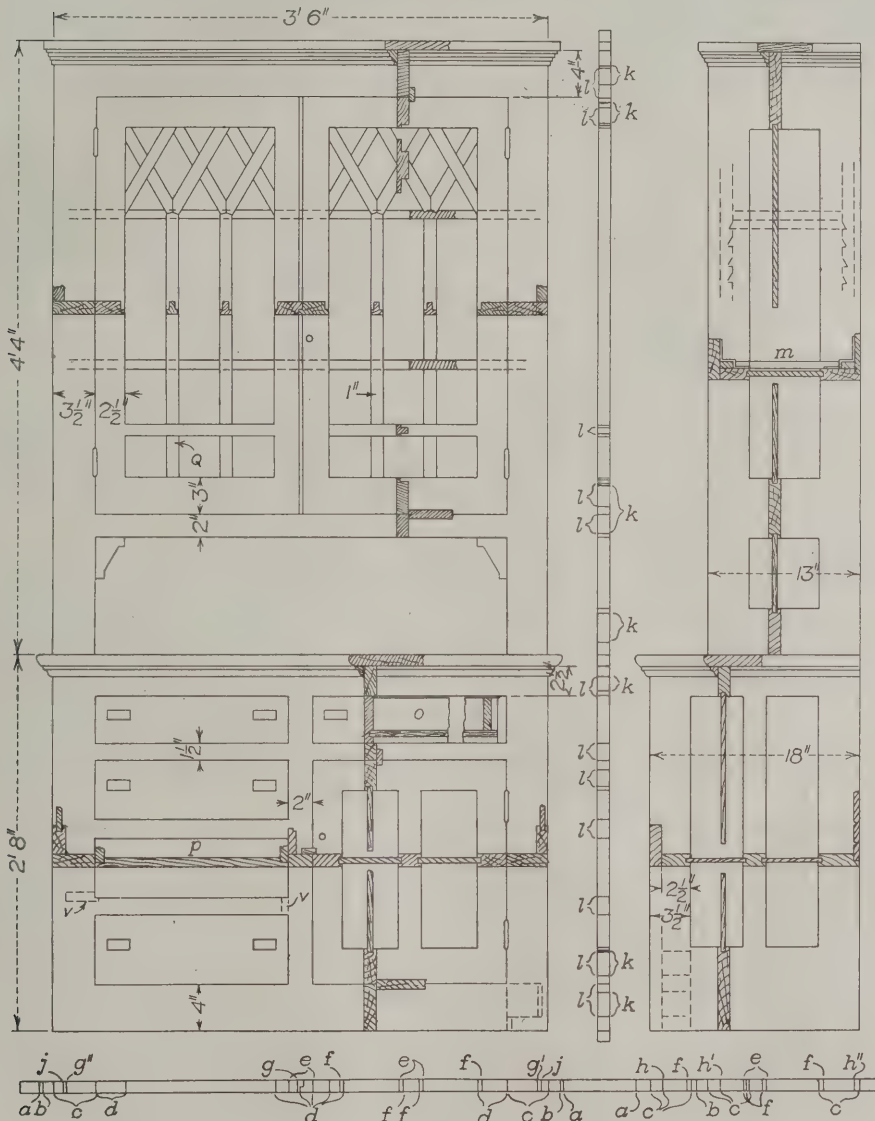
Elevation and Section of the China Case—Scale 1/4 In. to the Foot
